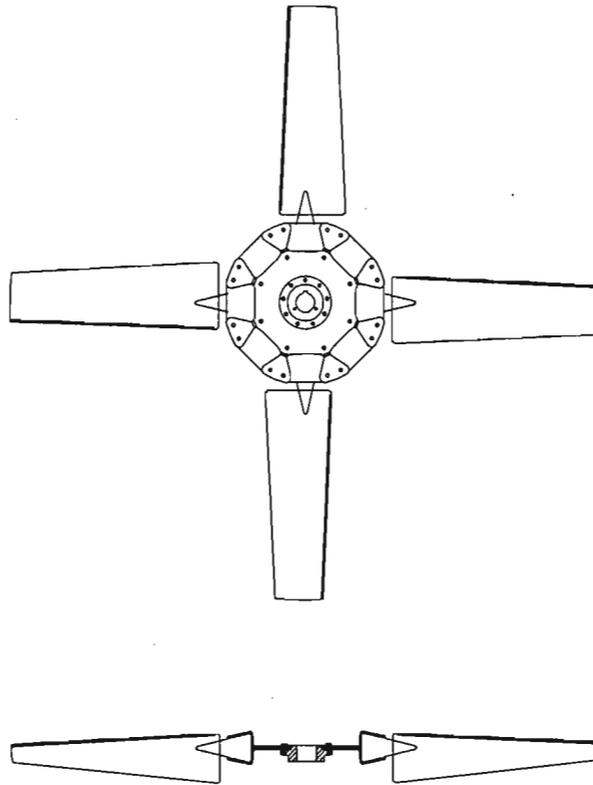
Four-Bladed 7X Fan Assembly
